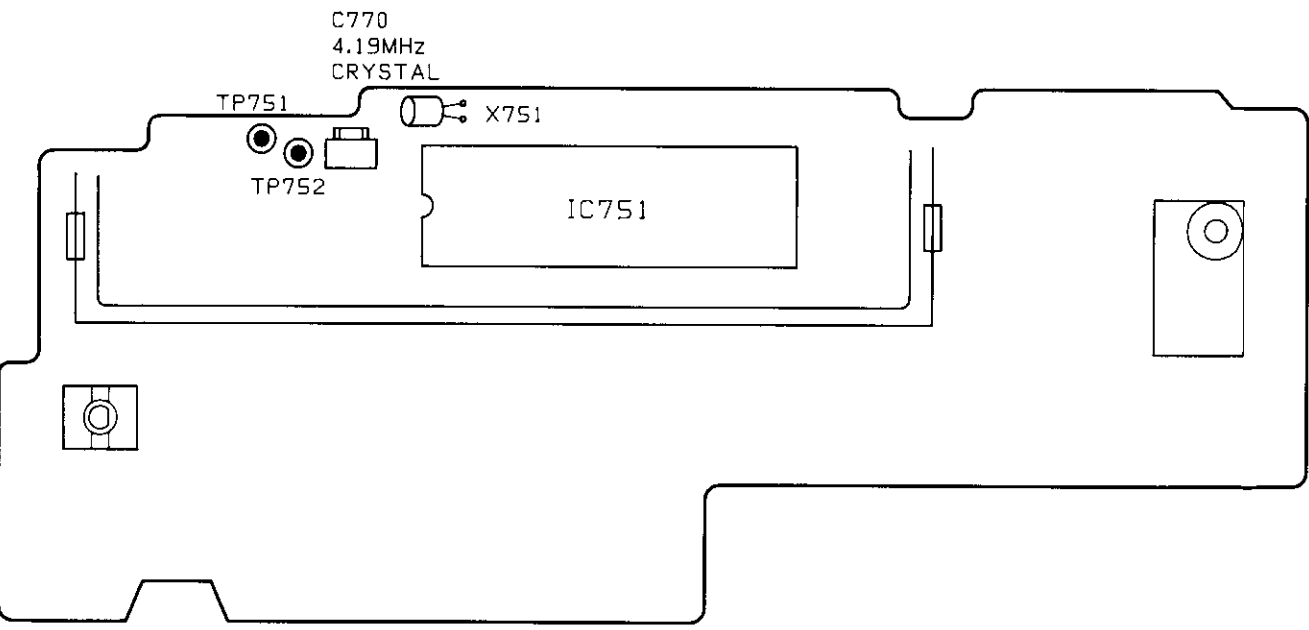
Components on Timer Circuit Board (Component Side) — VT-110E —
